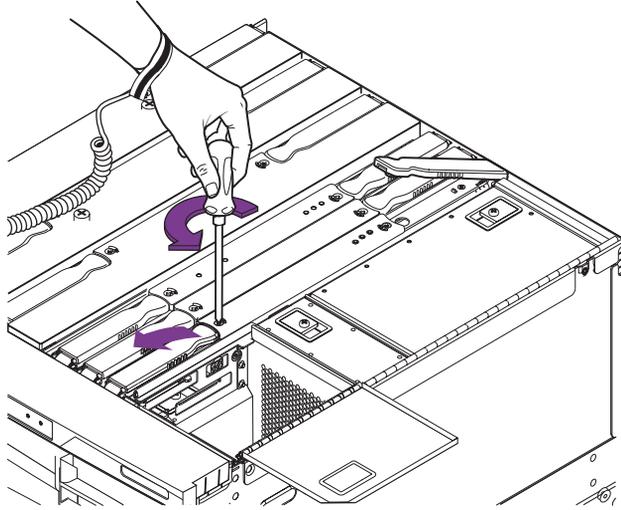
Unlocking the IB_SSC Assembly Ejector Levers
